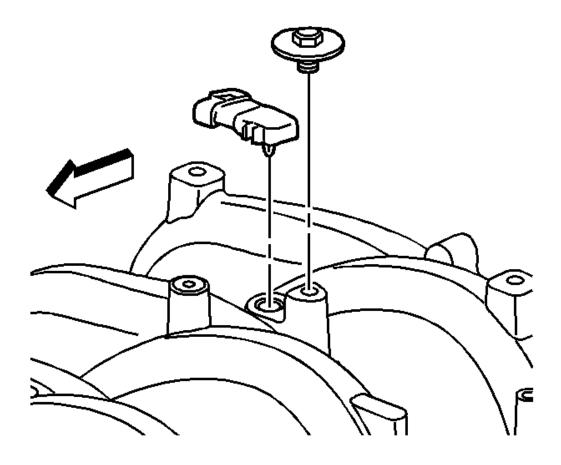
View Of MAP Sensor & Grommet Courtesy of GENERAL MOTORS CORP.
